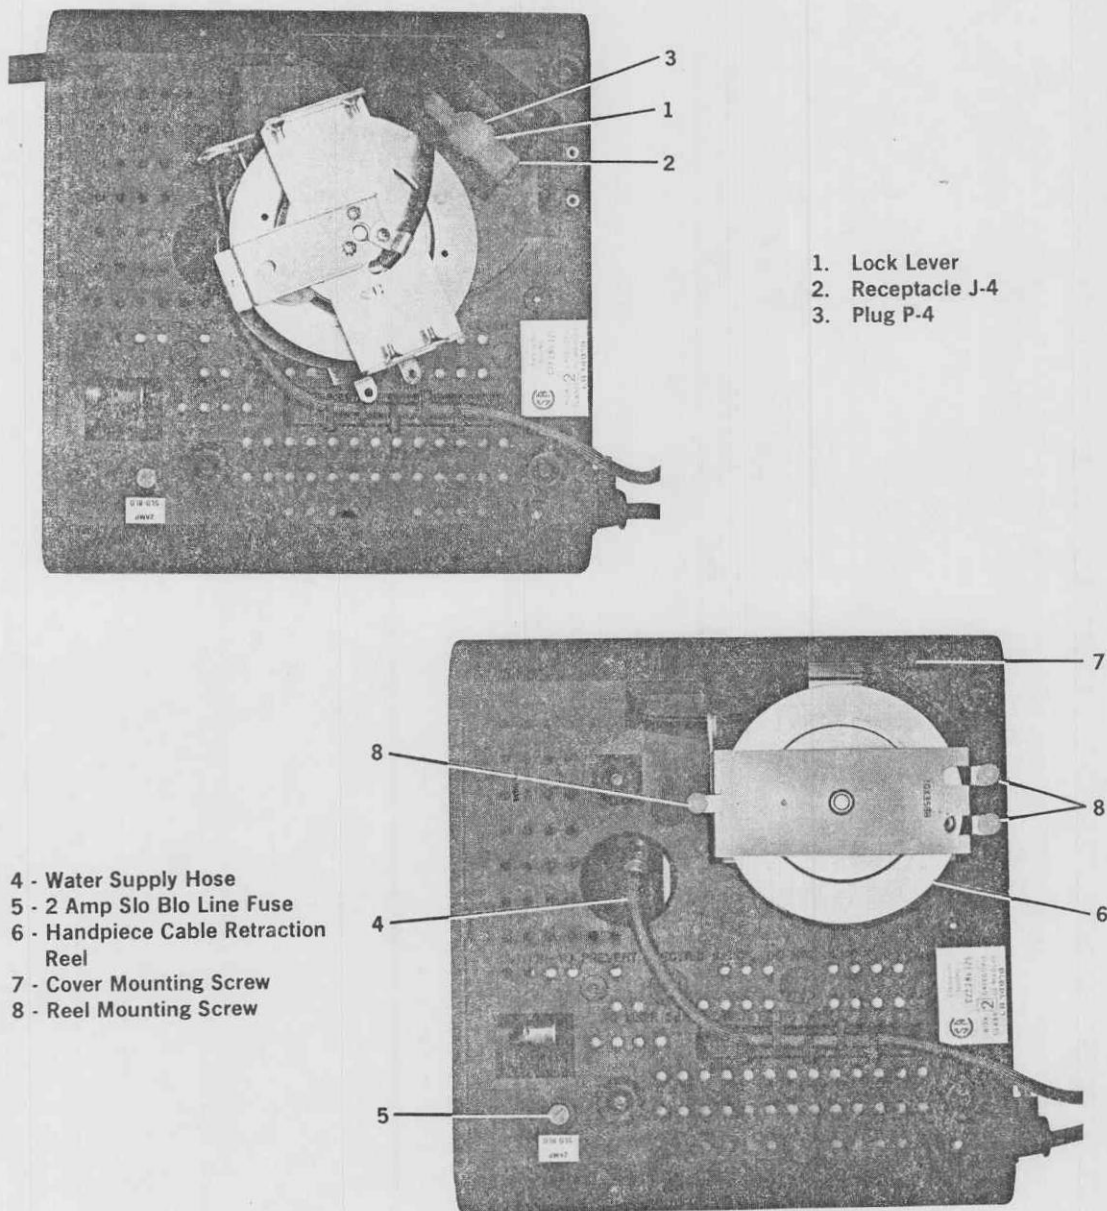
BOTTOM PANEL — U.S. MODELS SHOWN
